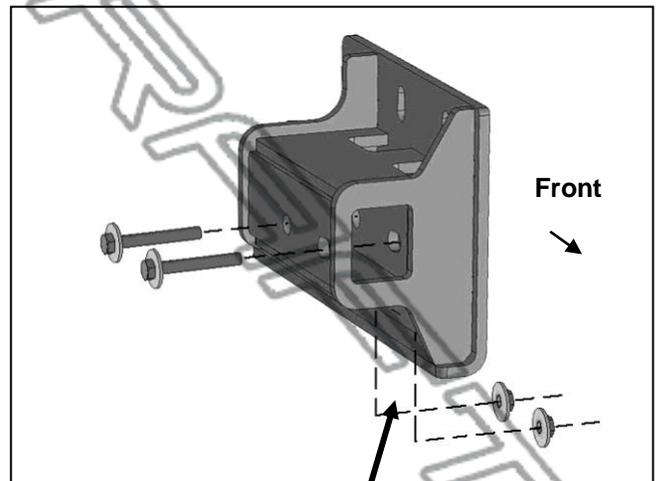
Locate and remove driver/left side bumper bracket to frame hardware
